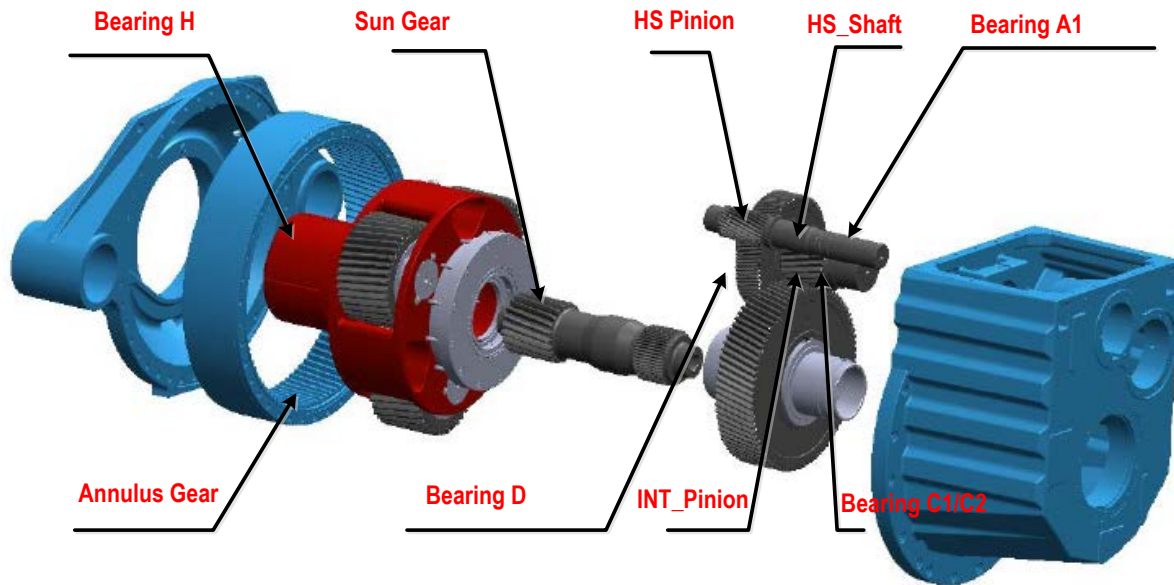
Locations of defective components in the gearbox assembly
